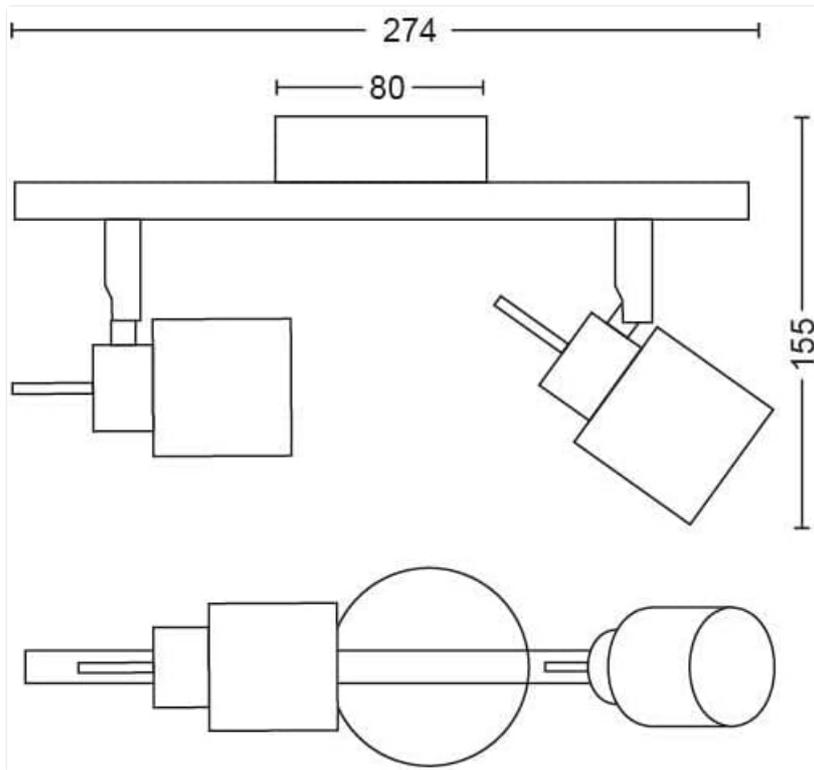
Technical drawing showing the dimensions of the Philips Meranti 2-Spot Metal Lamp (dimensions in mm).
